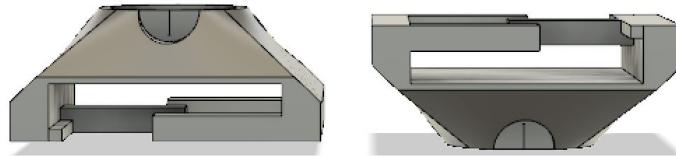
Side View of Actuator Inserts. CAD done in Fusion360.
